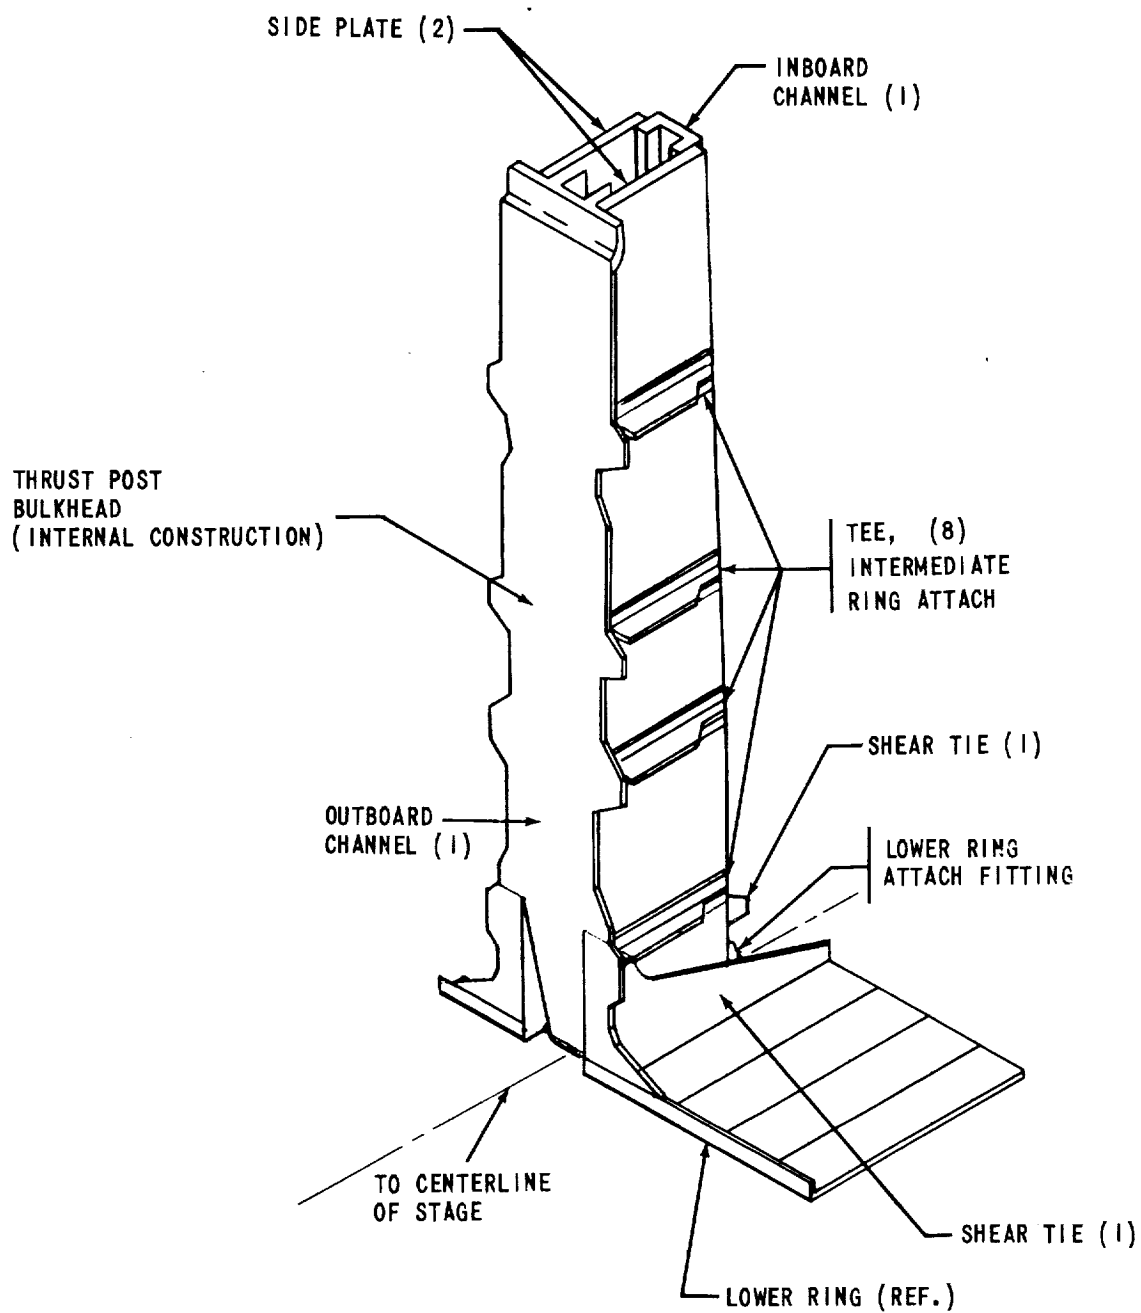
DETAIL C THRUST POST ASSEMBLY
